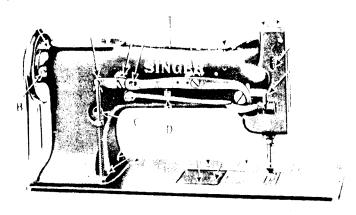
Oiling Points at the Back of the Machine Also Adjustments on the Machine
